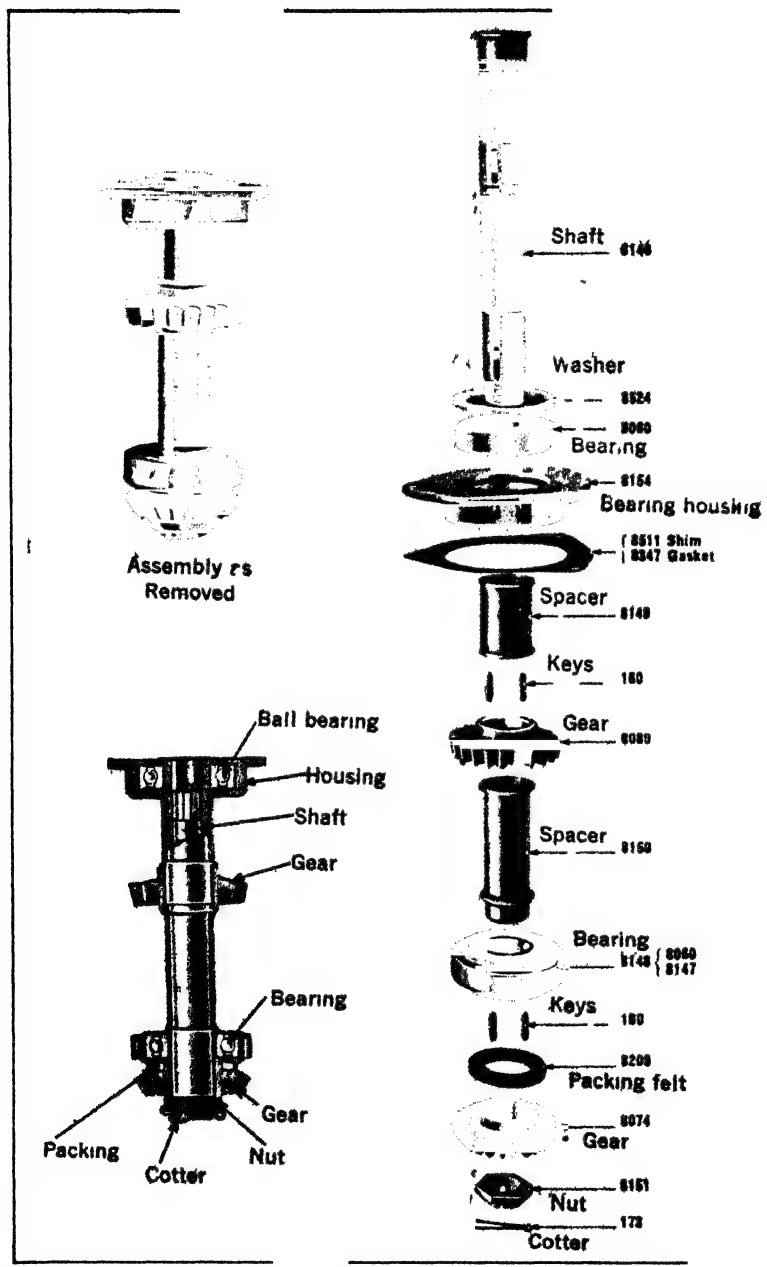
Generator Driveshaft Assembly of the Liberty Engine and its Parts.
